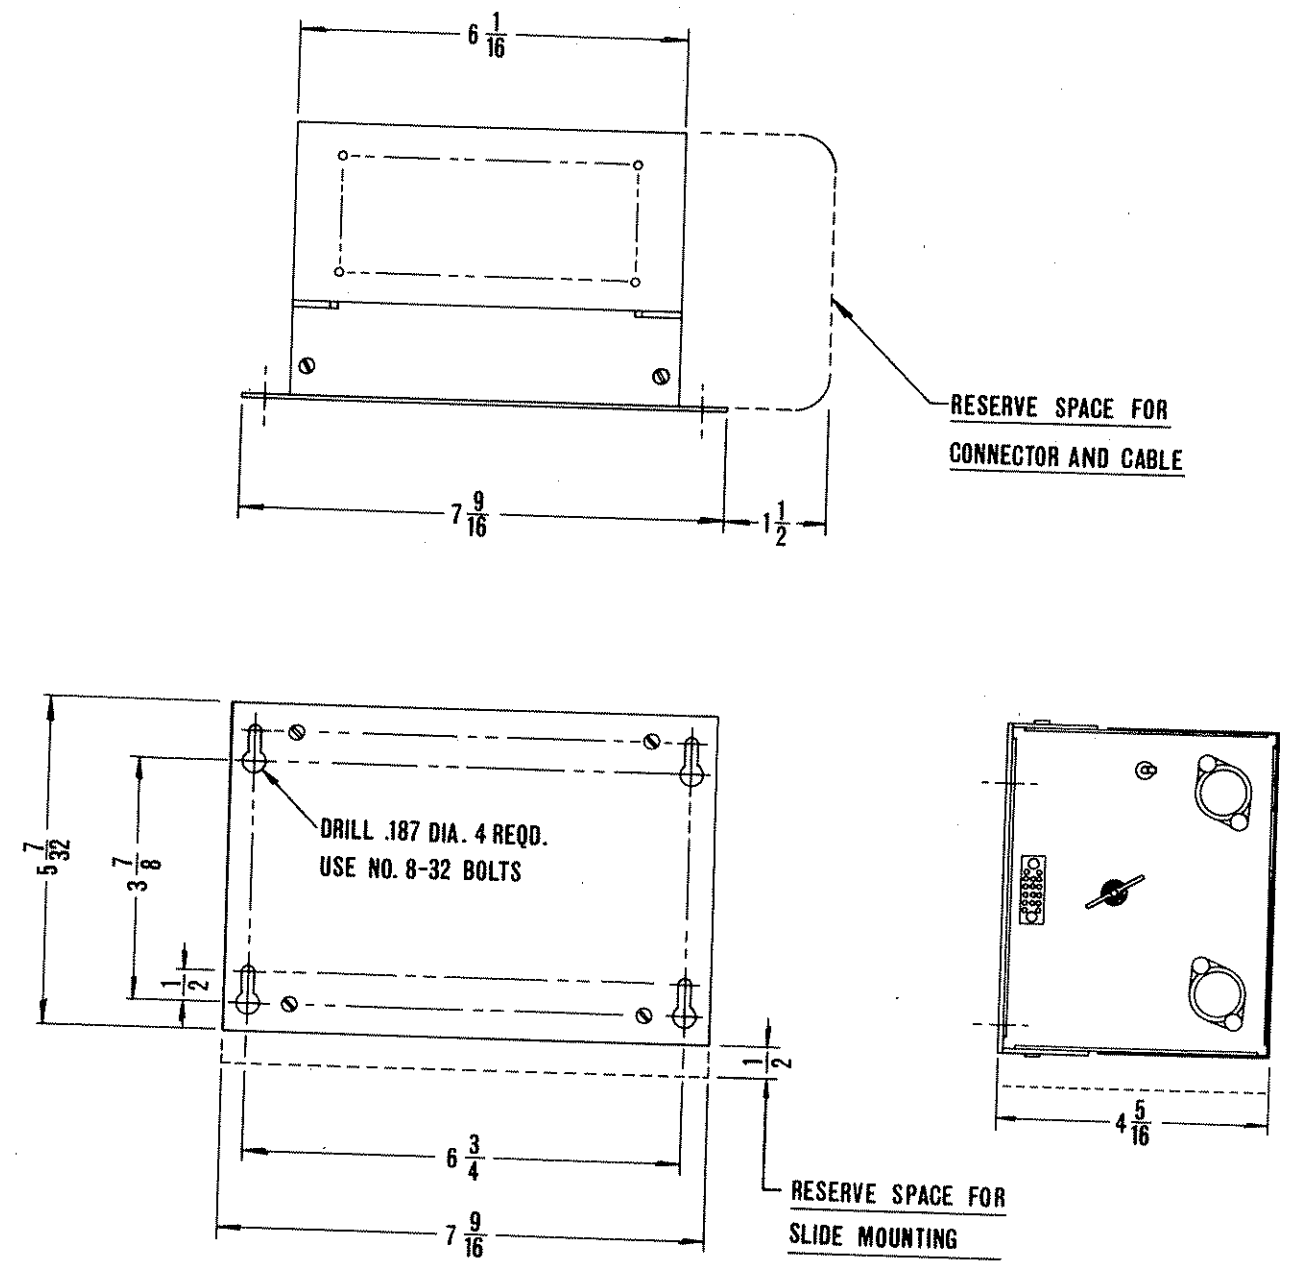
MODULATOR POWER SUPPLY MOUNTING DIMENSIONS
